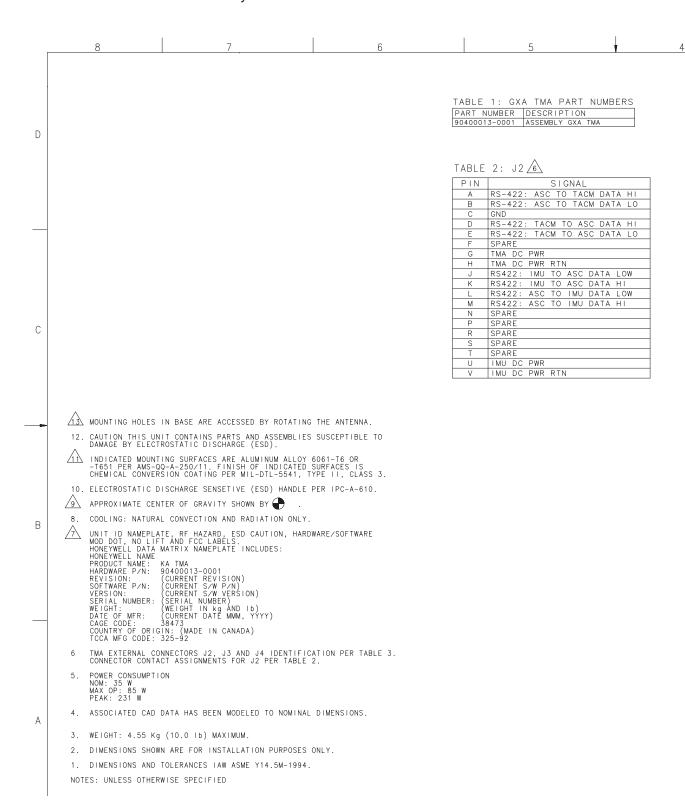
TMA Outline and Installation Drawing (Sheet 1 of 4)
